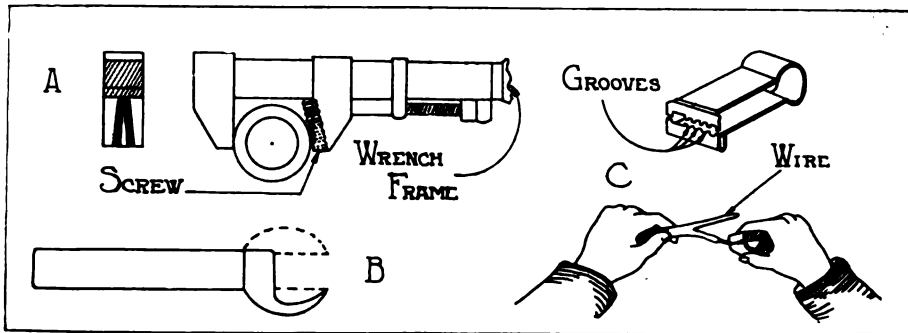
A, Showing Groove Cut in Movable Jaw and Monkey Wrench Converted into Pipe Wrench; B, Broken Set Wrench Ground to Make Cotter Pin Puller; C, Handy Tool for Stripping Insulation from Cables.
